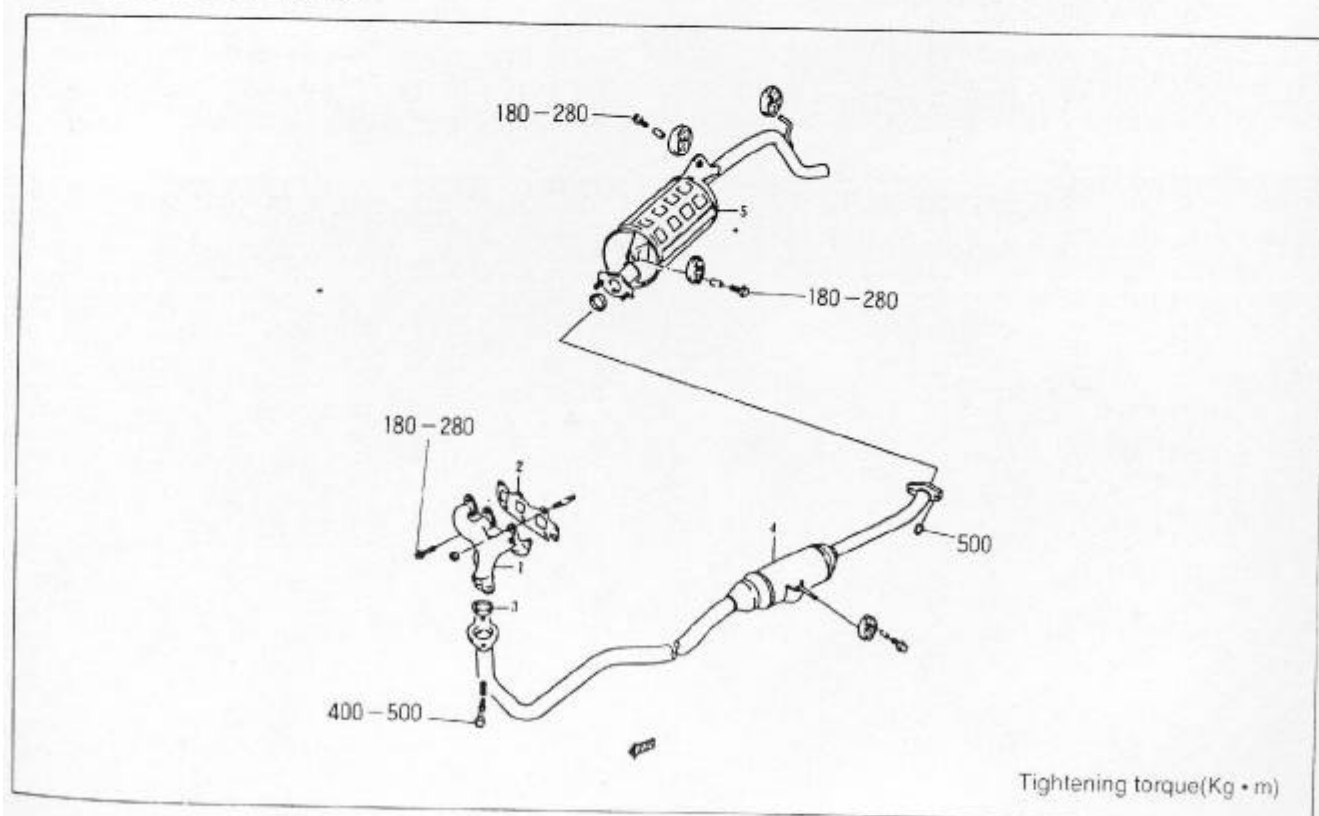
2 VIEW OF TIGHTENING TORQUE
